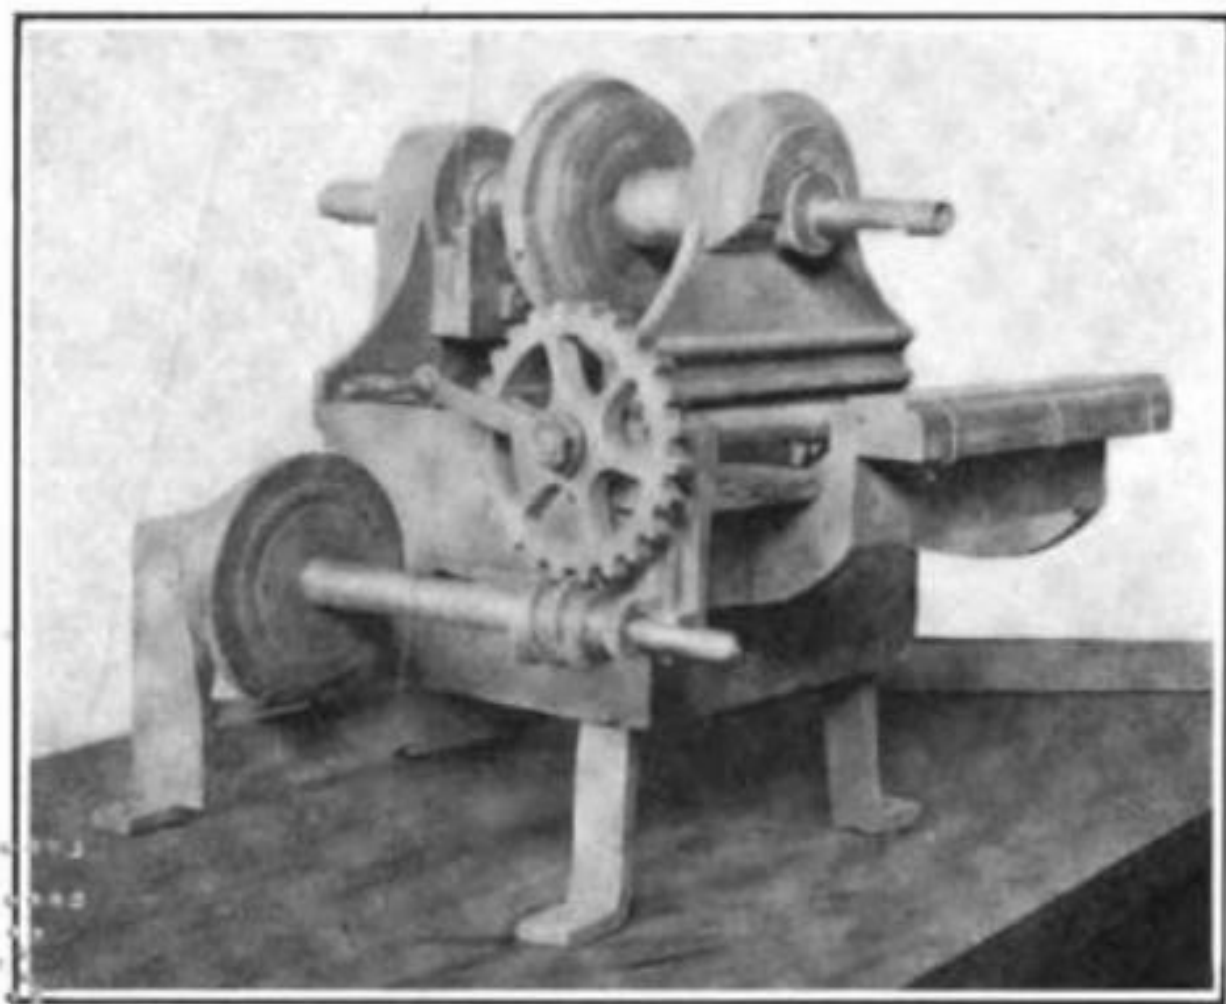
MAUDSLAY'S SCREW-CUTTING LATHE
